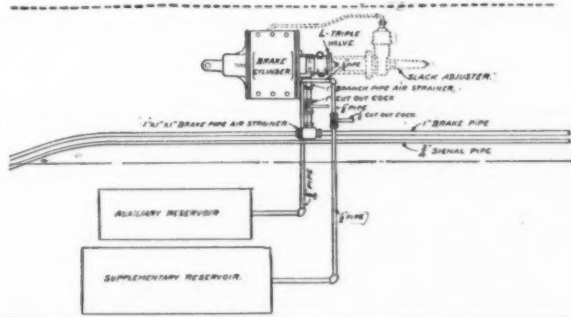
IMPROVED PASSENGER BRAKE EQUIPMENT, TYPE "LN"
